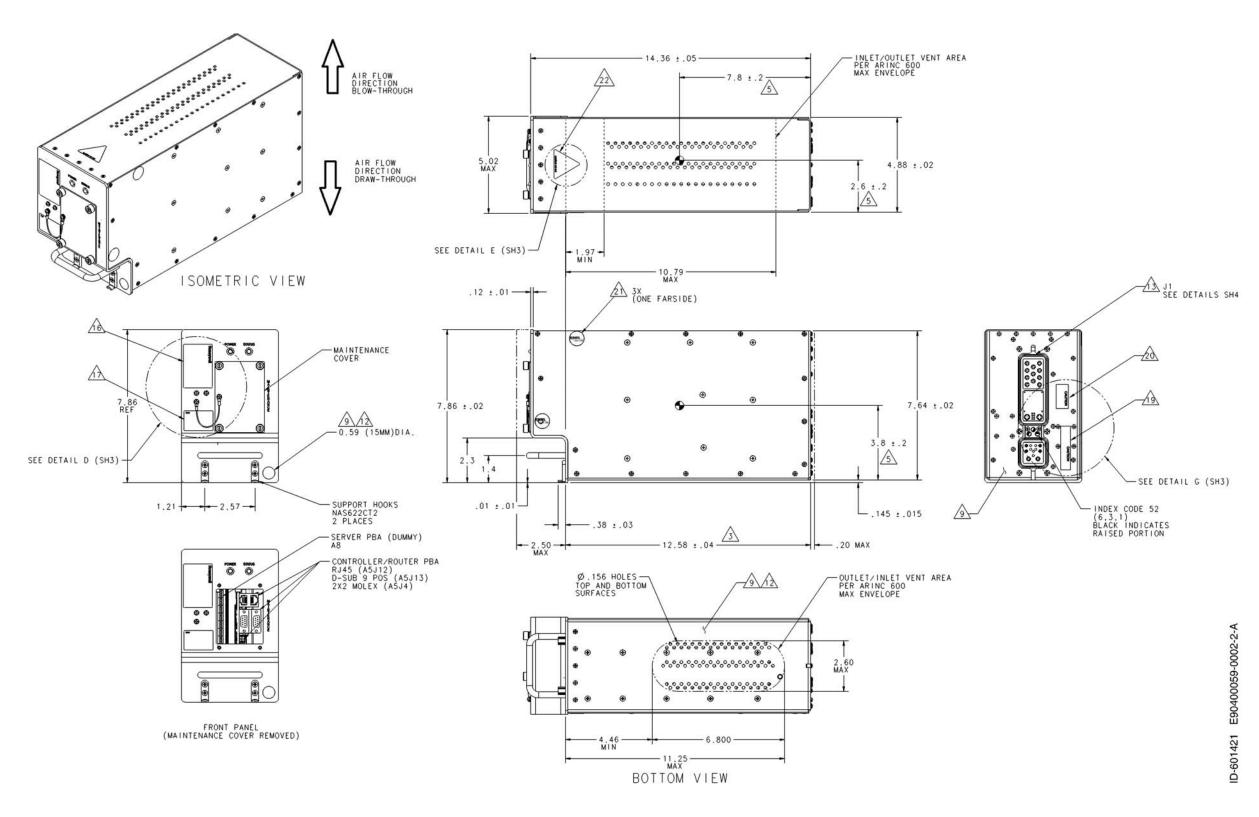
(Sheet 2 of 4) Modman Outline and Installation Drawing Variant 2 (90400059-0002, REV A)
